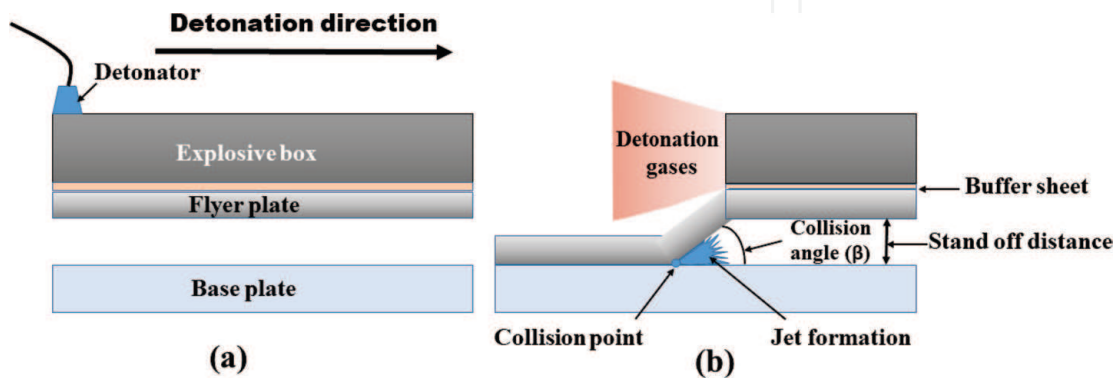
Schematic diagram of explosive welding process in parallel set-up, a) initial set-up, b) after the explosion has initiated.
